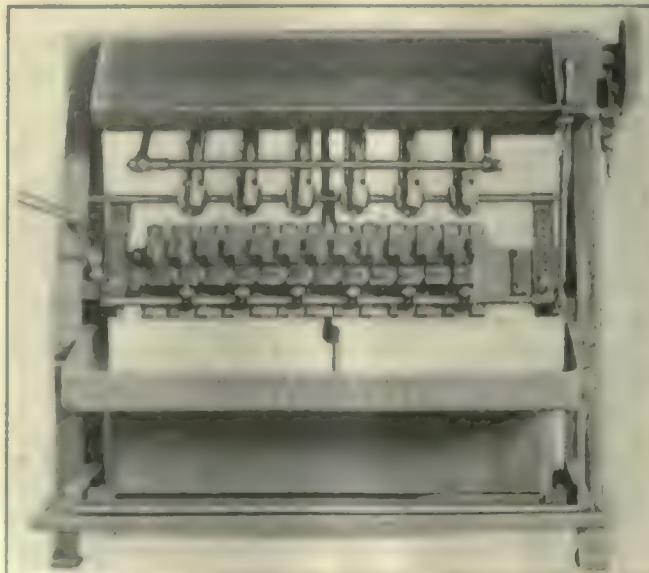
HOLMES MACHINE FOR EXTERNAL THREADING
